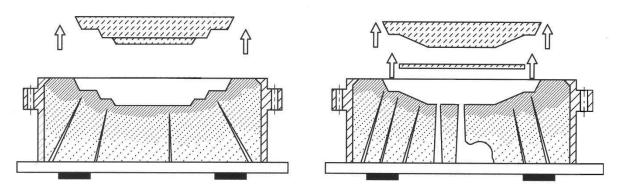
Ejection of split pattern, gate, and dirt catcher from mould
